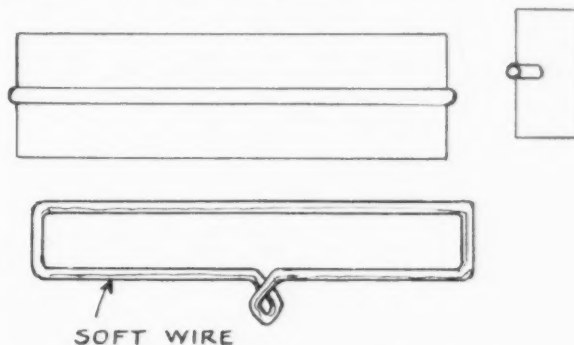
Parts that are grooved may be buffed by inserting a soft wire in the groove to protect sharp edges.
